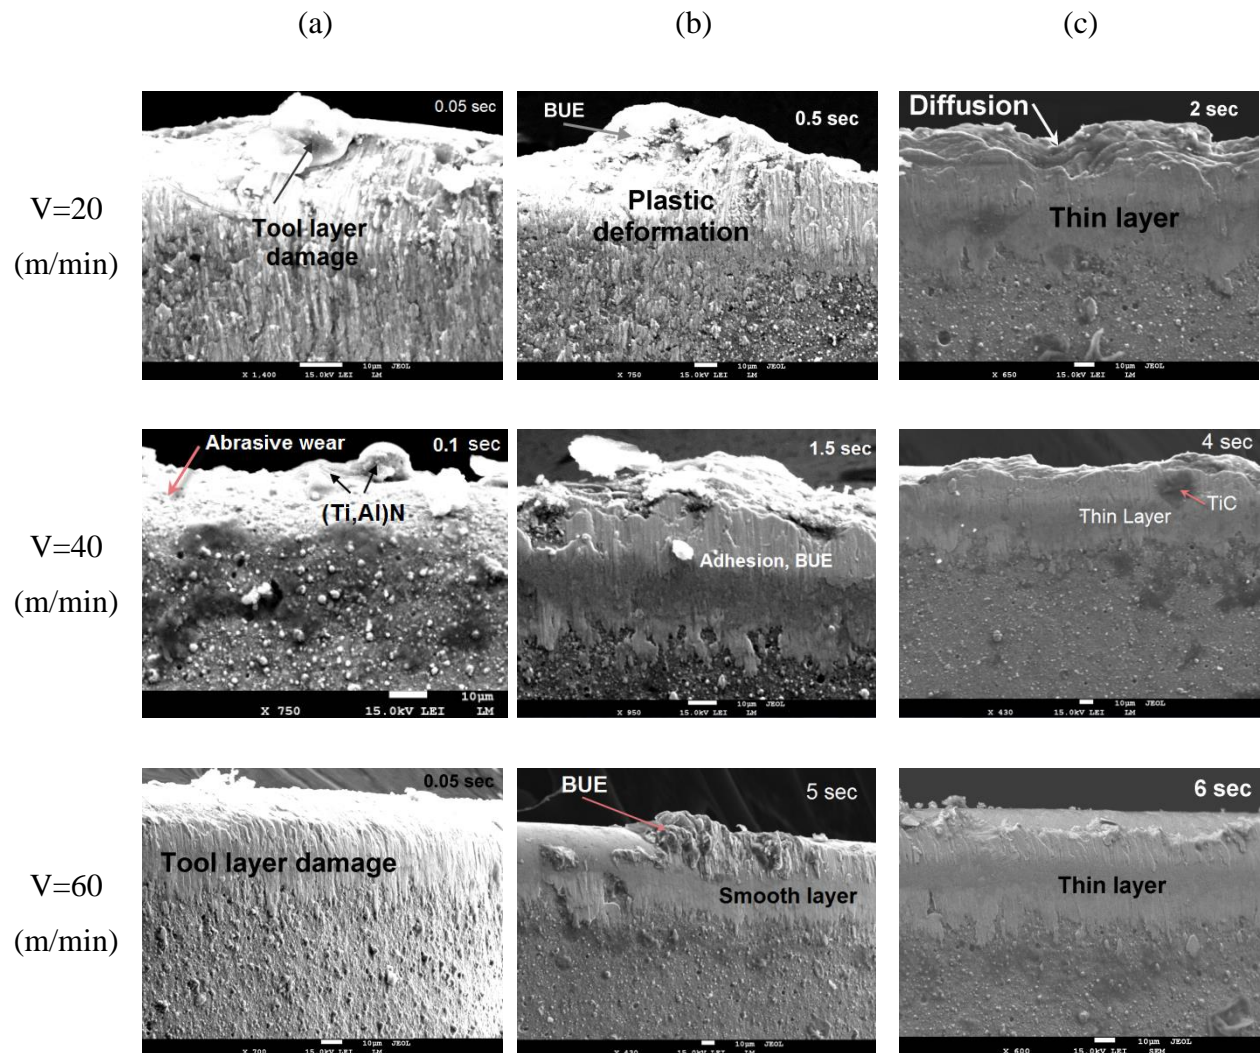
Initial tool wear mechanism on the clearance face during machining of TiMMCs
